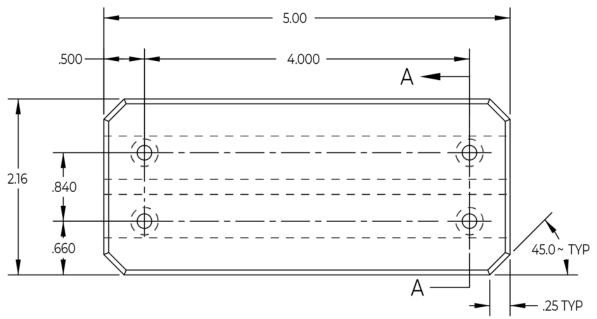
PIPE MEASURING MOUNTING PLATE DIMENSIONAL DRAWING
